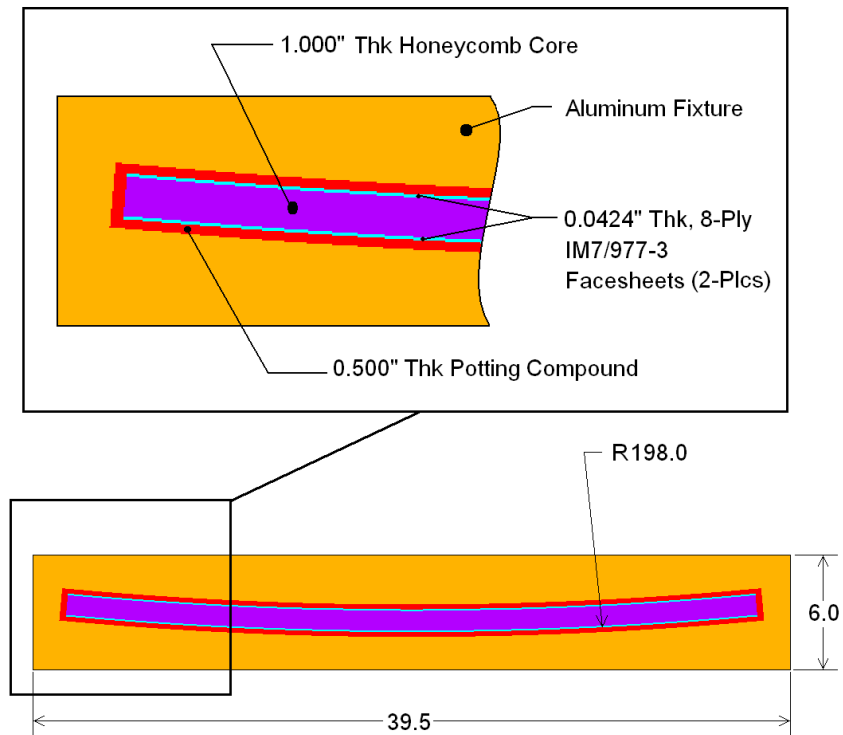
The 3- by 5-ft arc segment test panel and test fixture end view.
